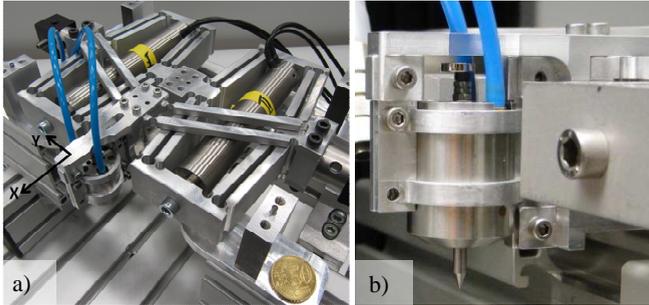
MMU consisting of flexure based feed unit [3] and air bearing spindle [4]
